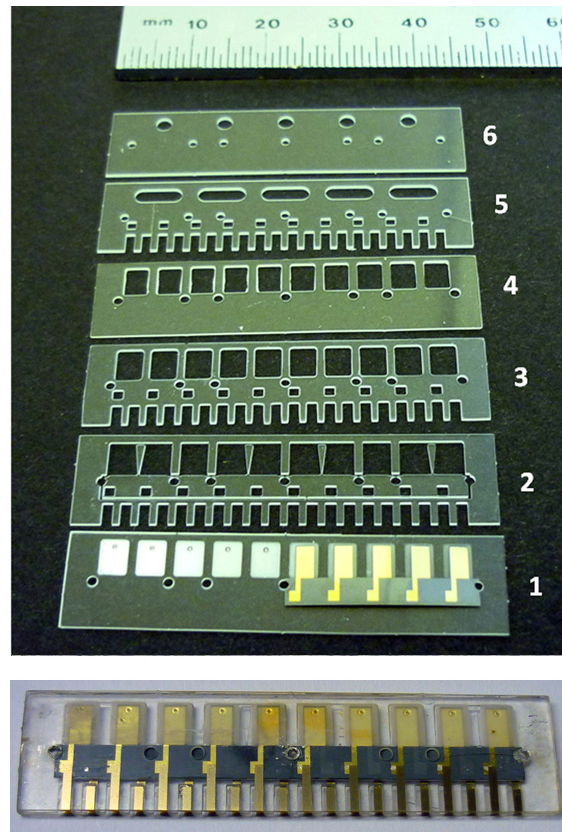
The Foturan components used to construct the microvalve (top) and an assembled microvalve array (bottom) with dimensions 11x46x2mm.
